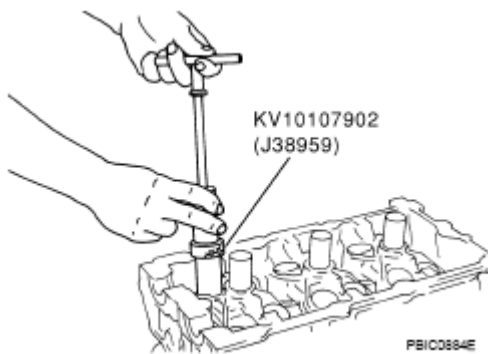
Identifying Valve Oil Seal Using Valve Oil Seal Puller
